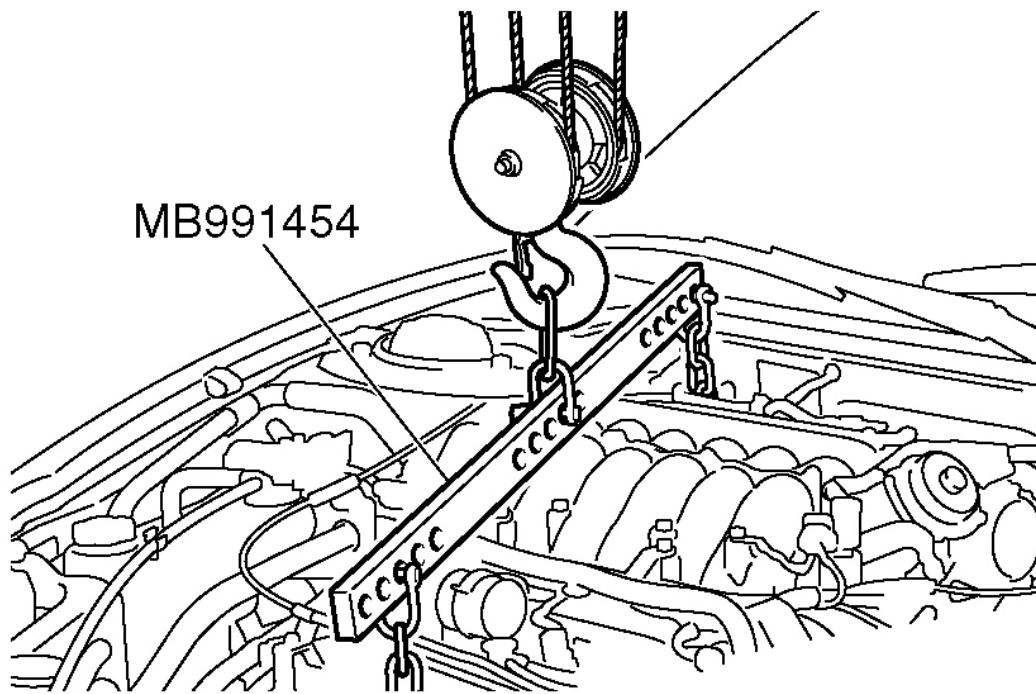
Removing Transaxle Assembly Using Special Tools MB991454 And MB991928
